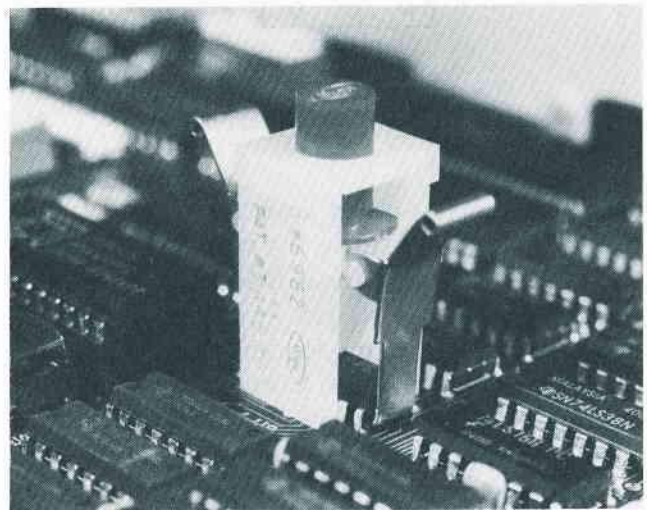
A spring-loaded dual-in-line extractor tool.
